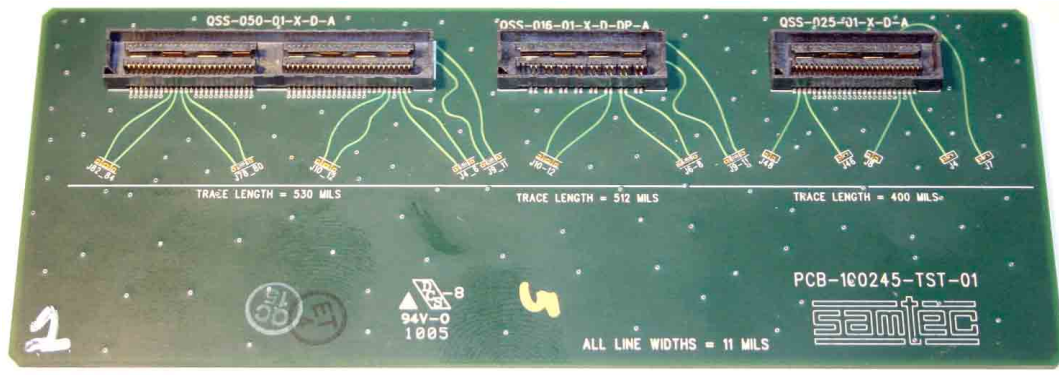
Mated PCB Test Fixture with Mounted Test Connectors
